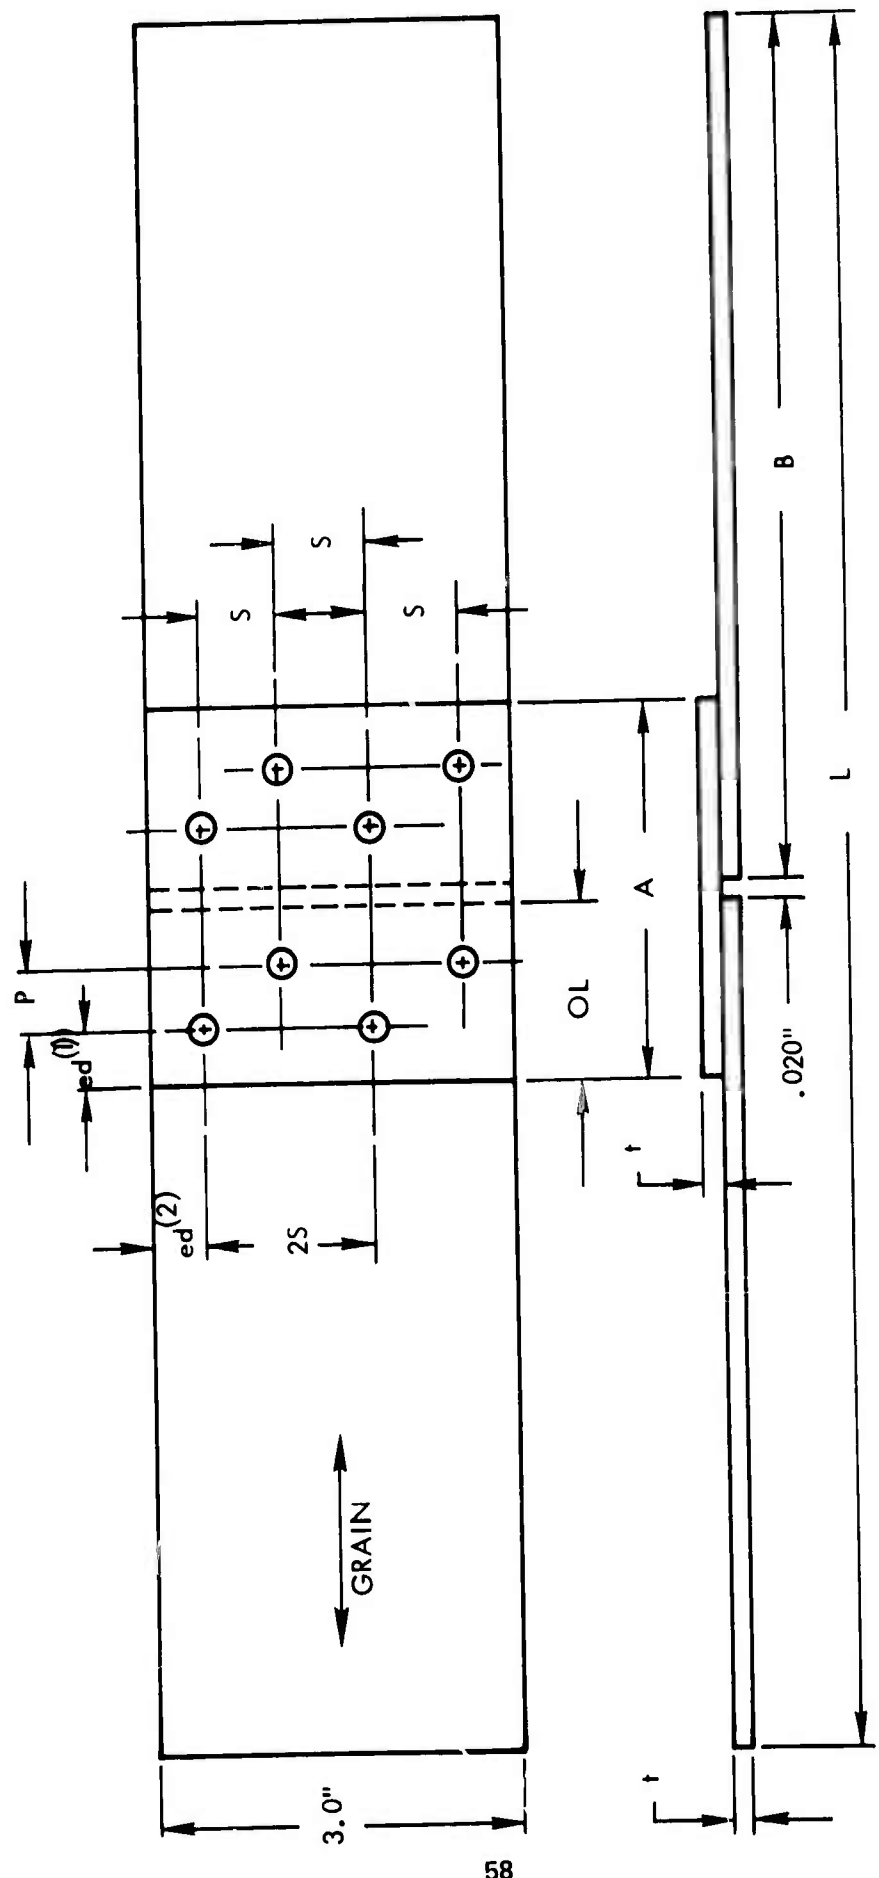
STAGGERED ROW WELD PATTERN SPECIMEN
